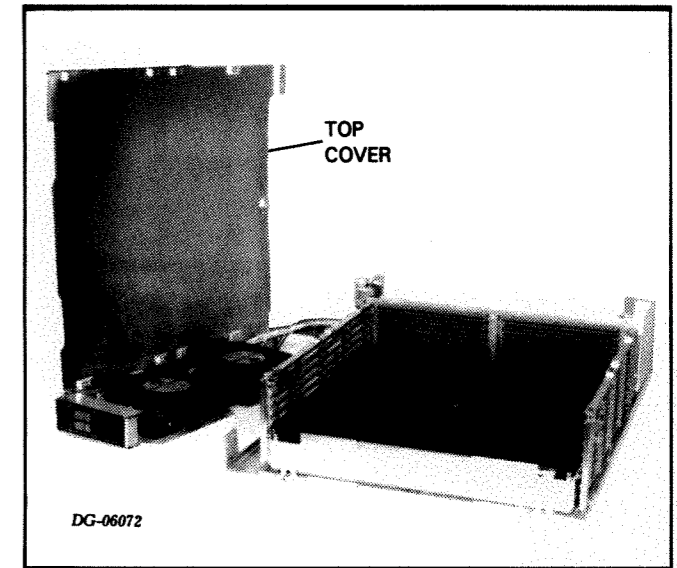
REMOVING TOP COVER FROM 5-SLOT CHASSIS
